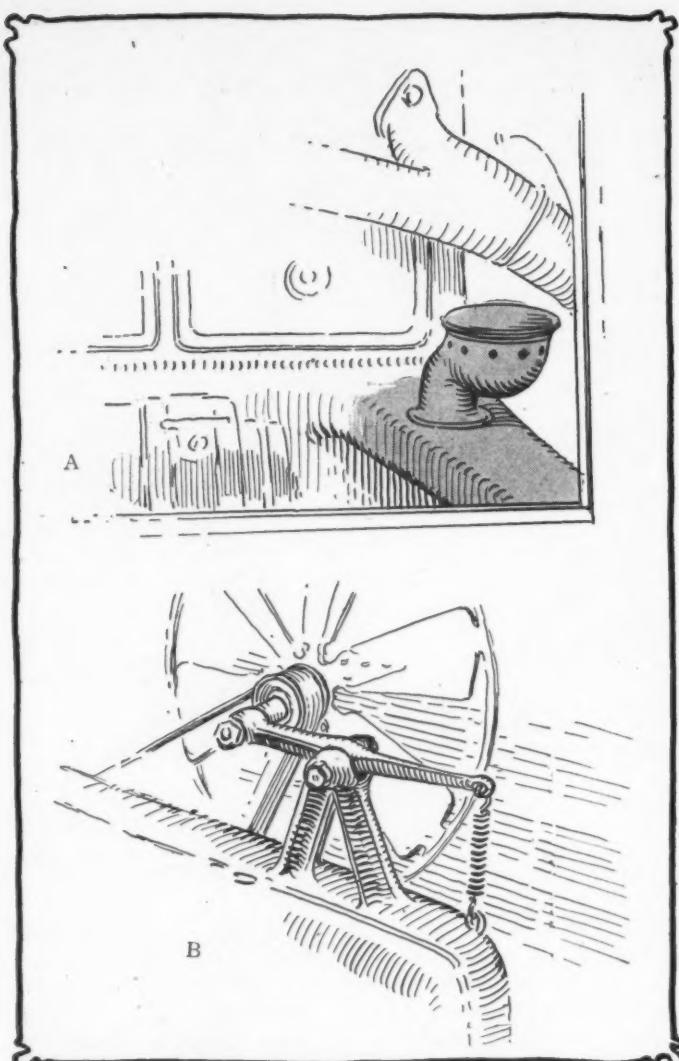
A, Oil filler on S.G.V. cars; B, Spring tension on Velle fan belt
